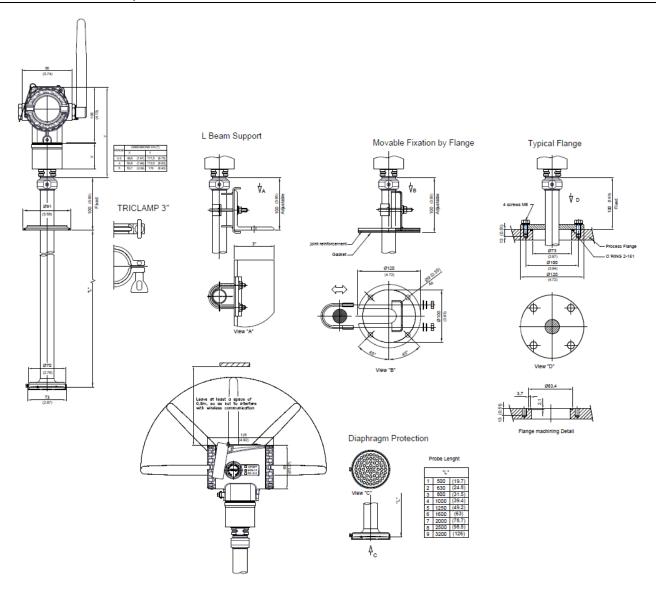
(g) – Dimensional Drawing and Mounting Position for the LD400 WirelessHART™ – Pressure Transmitter with Extended Probe
